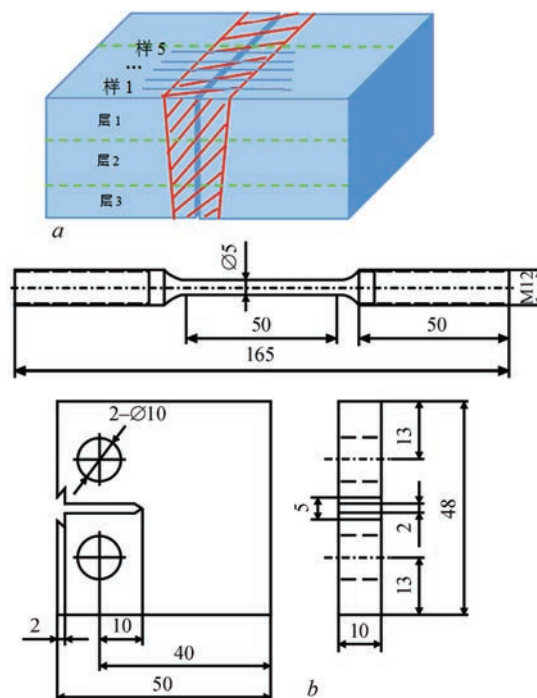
Fatigue specimens and cutting method: *a* — cutting position of fatigue specimen; *b* — fatigue specimens and fatigue crack propagation specimen
